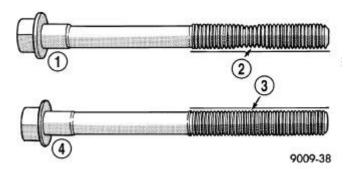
Check For Stretched Bolts And Thread Alignment Courtesy of CHRYSLER LLC
